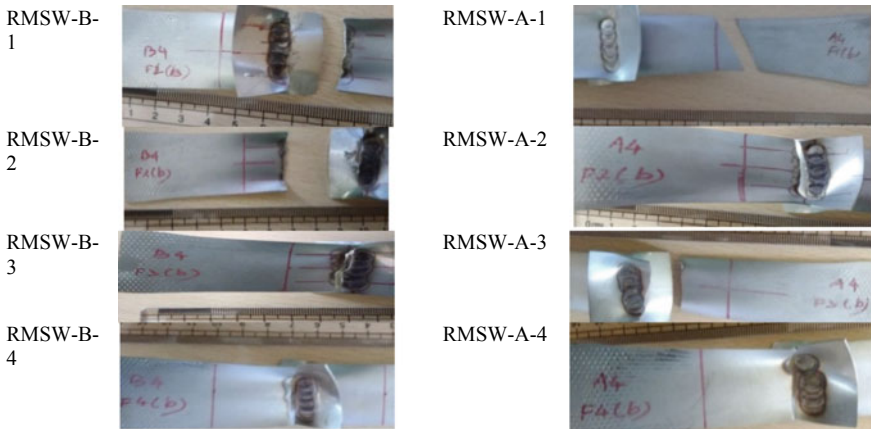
Photographs of resistance multi-spot welded samples after tensile shear testing
